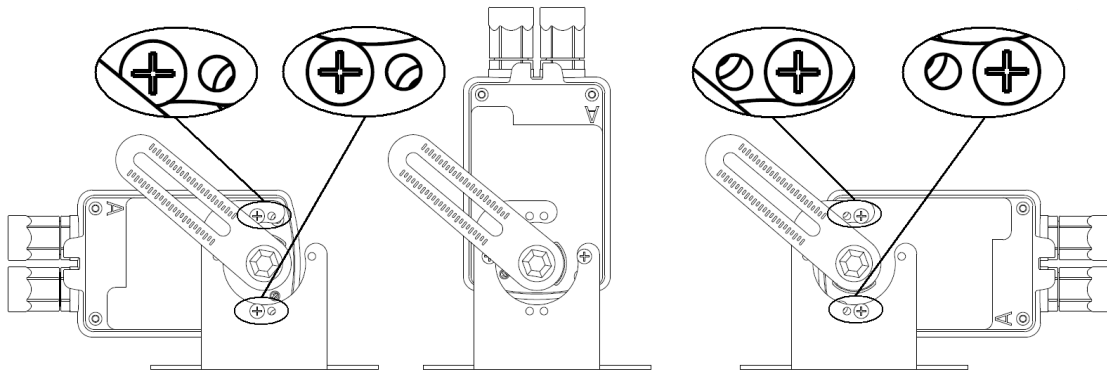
M9203-100 Remote Mounting Kit with actuator horizontal left, vertical, and horizontal right
